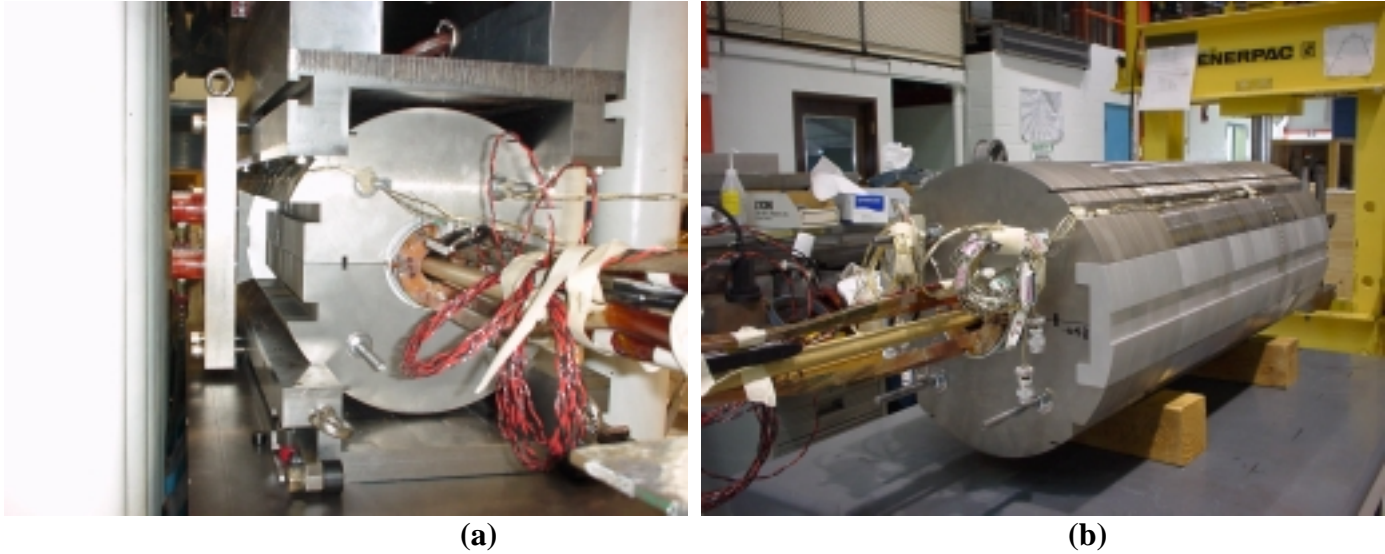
(a) Magnet assembly in the yoking press. (b) Yoked magnet.
